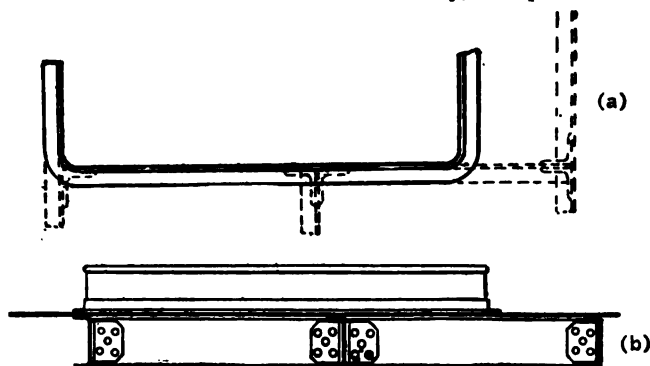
CARLING. (A) PLAN, (B) ELEVATION.
